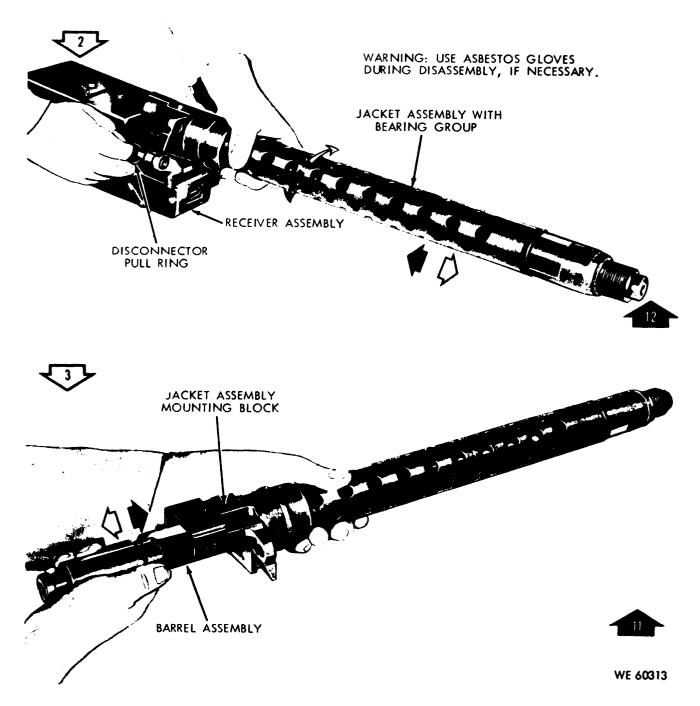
Disassembly / assembly of machine gun. (2 of 4)
